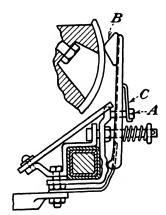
Drum controller, sectional view, showing the sliding contact made between the finger B and the drum cylinder.
